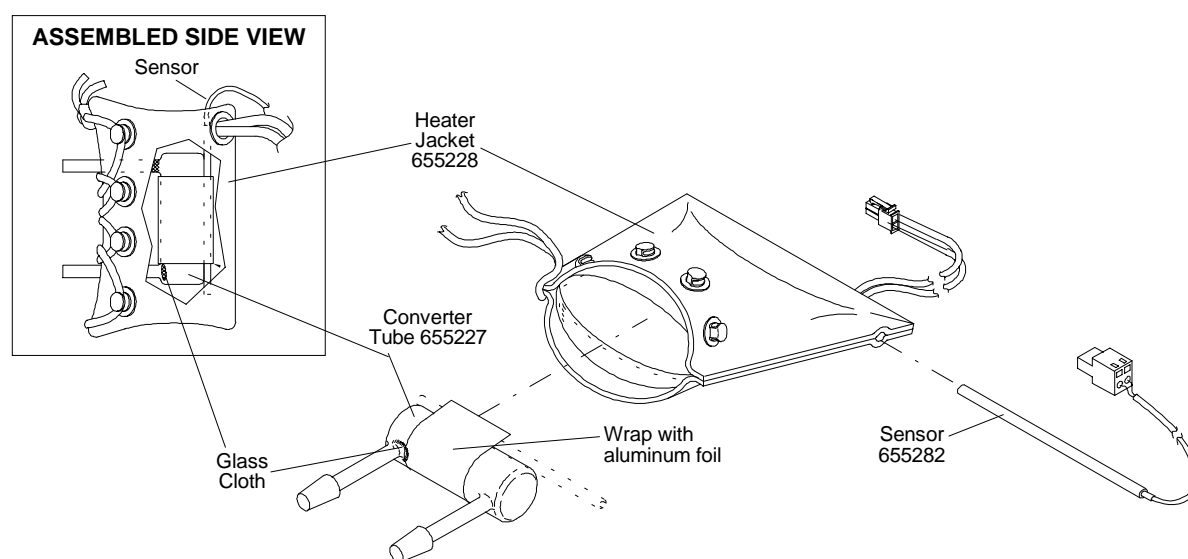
CLD MODULE ASSEMBLY
